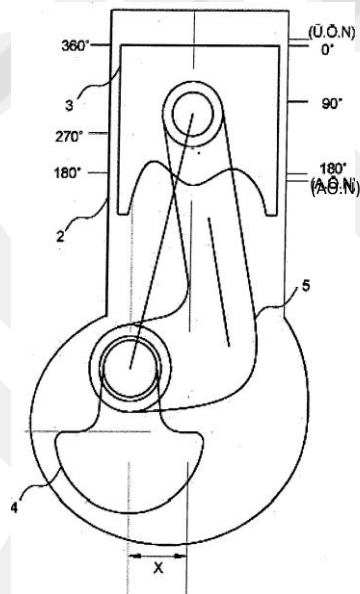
Schematic view of the position of the piston in the cylinder system of the engine that is the subject of the invention [2].
